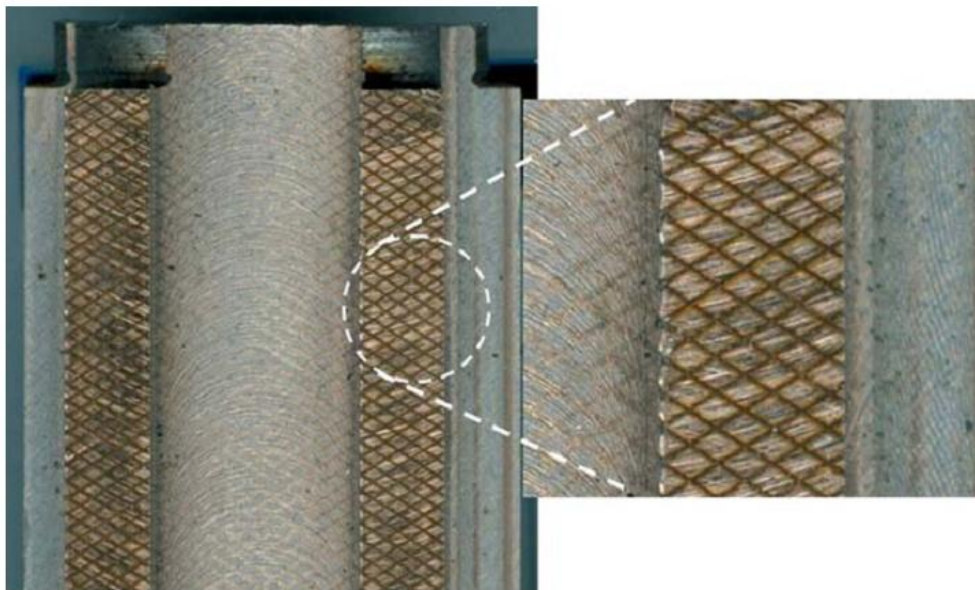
Cross-hatched pattern of lubrication groove using CNC milling and laser machining [69]
